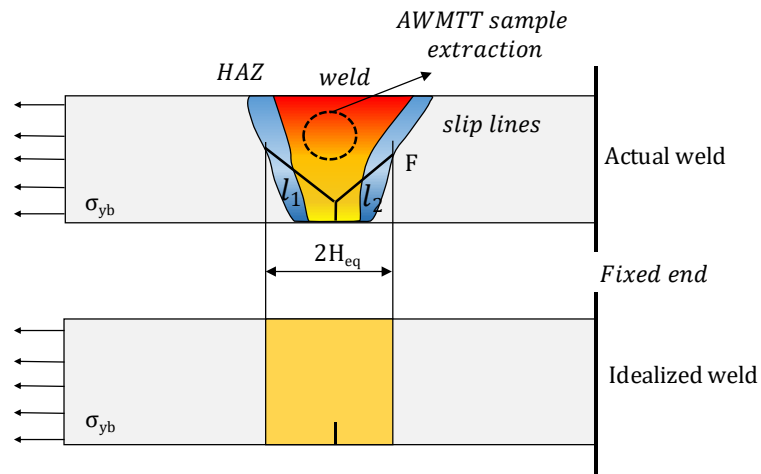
Procedure to idealize a weld using all weld metal tensile test and slip line assumption
